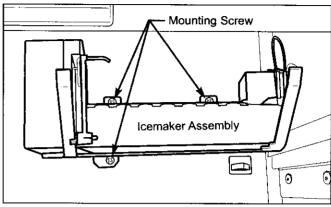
Icemaker Removal (700BCI-3/700BFI-3)
